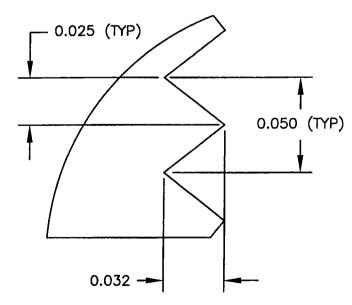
DETAIL B: RIDGE DETAIL PARTIAL SECTION SCALE 1:20
